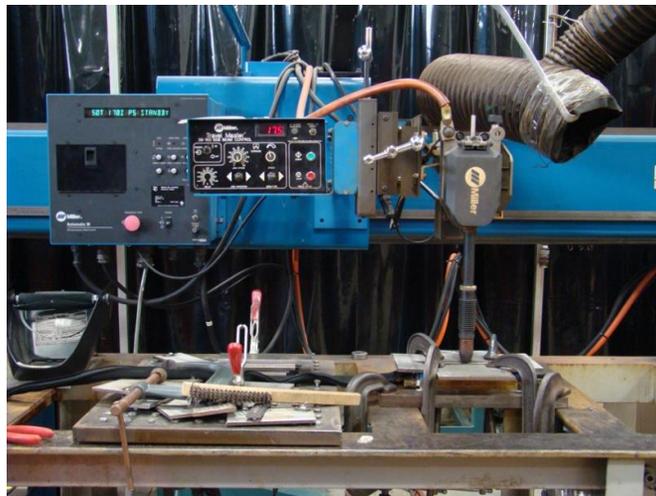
GMAW Equipment and Welding Setup for Production of ERNiCuRu Weld Test Assemblies at the Ohio State University
